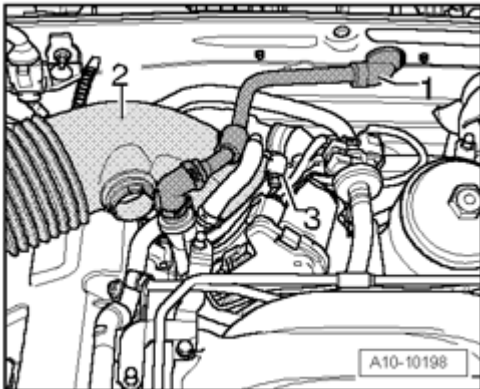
Identifying Vacuum Hose, Intake Hose & Clamp
